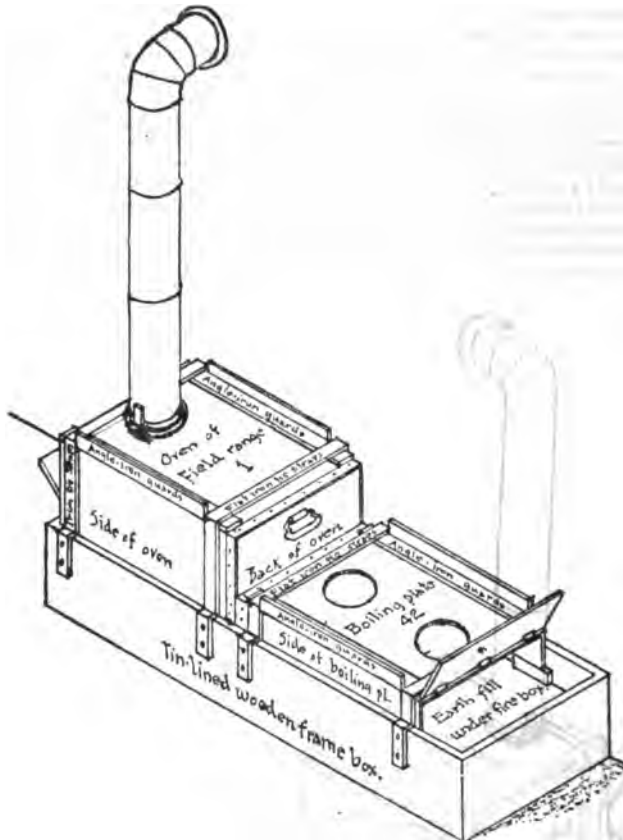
Alternative isometric sketch, showing installation of Army field range 1, with boiling plate 42, back to back, in frame box, on car, for use in transit, without Alamo attachments.
